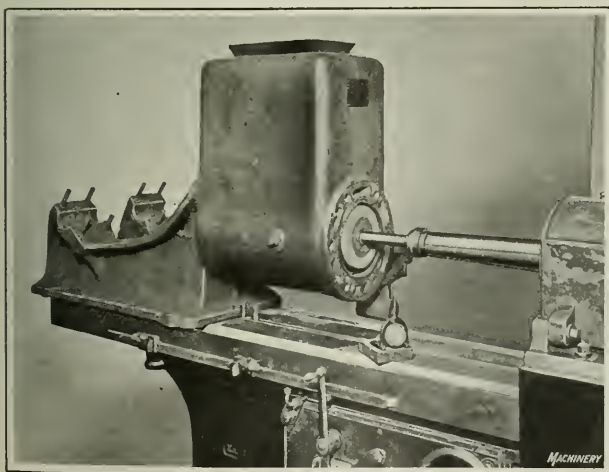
Stationary Engine Cylinder set up for regrinding the Bore
